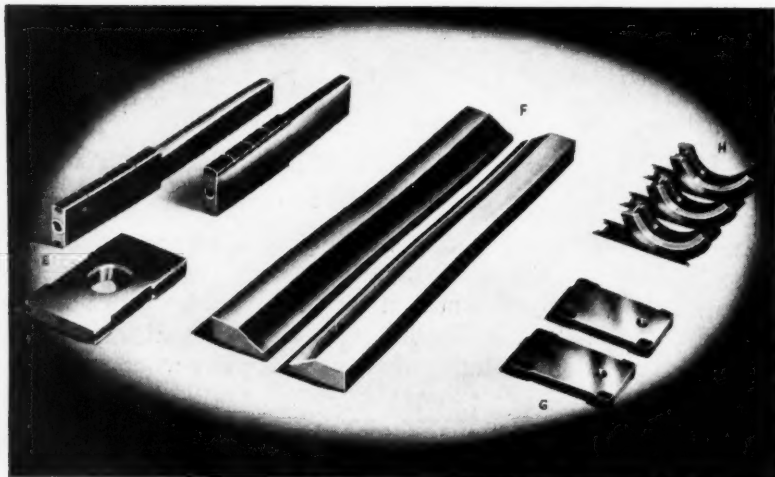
Plug and Width Gages, Straightedges, and Steadyrests with Inserts of Tungsten Carbide
